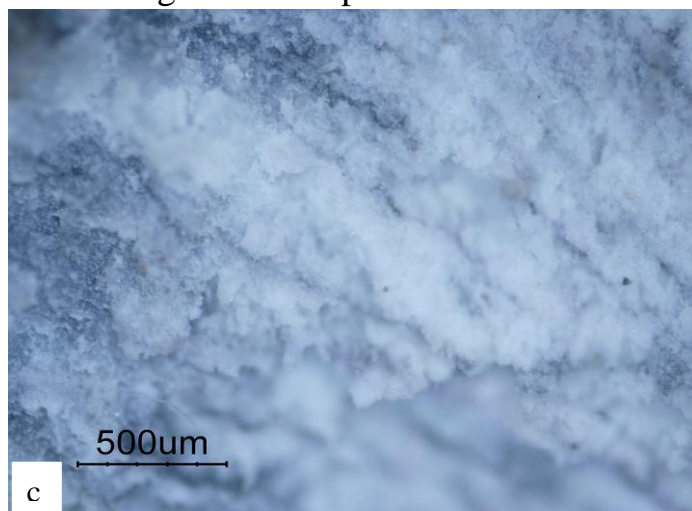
Fracture surfaces observations for the impact test samples (magnification 50x) .
